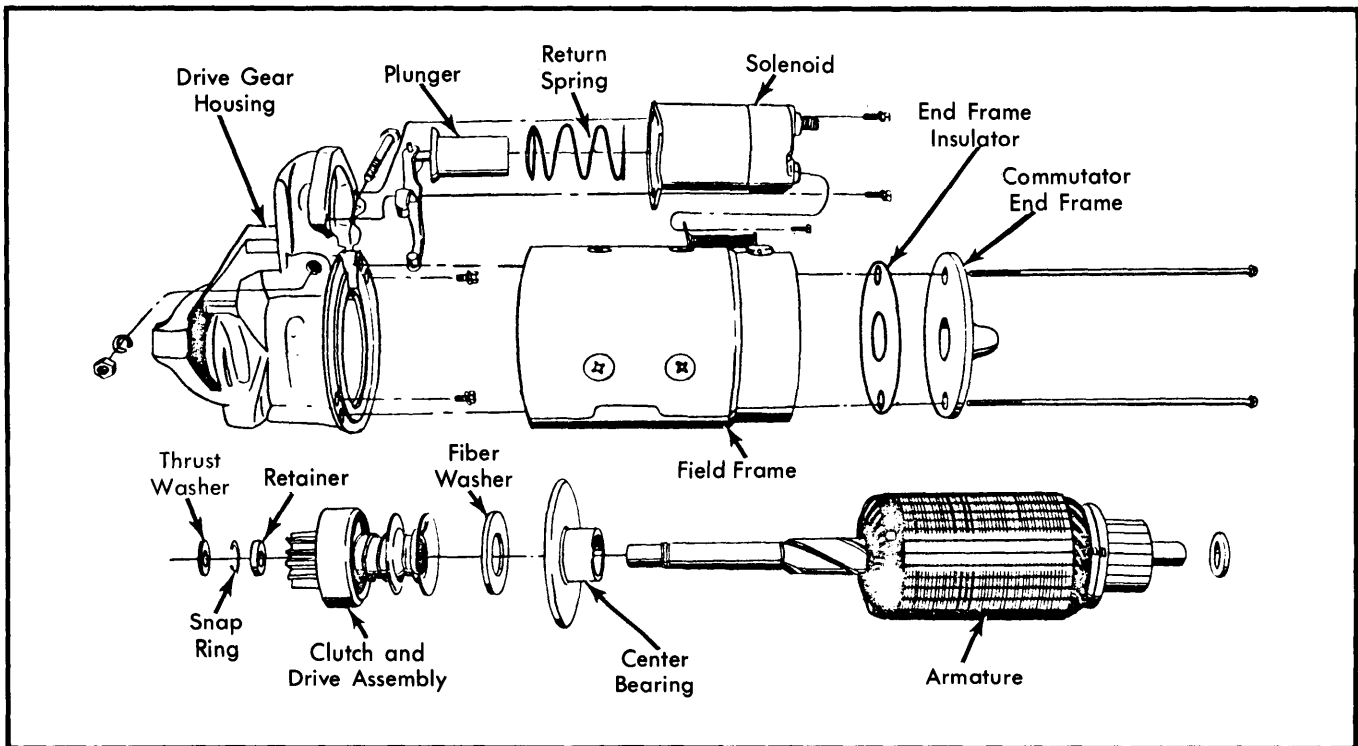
Exploded View of Starter Motor Assembly — Delco-Remy Diesel Series MT 25 Series 10 MT, (Same Exc. Center Bearing), Series 5 MT (Similar)
